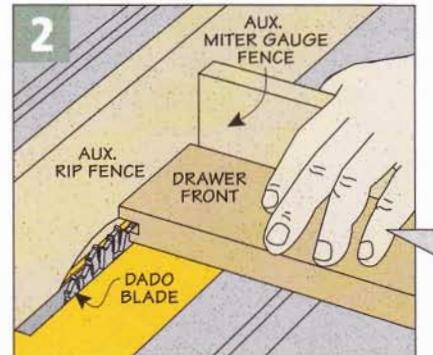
gives the dimensions for the groove. Once you have the setup adjusted, go ahead and cut the groove in the front.
